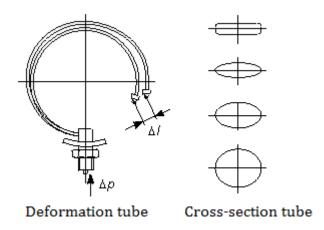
Bourdon tube (with examples of cross-sections) [13][14]
